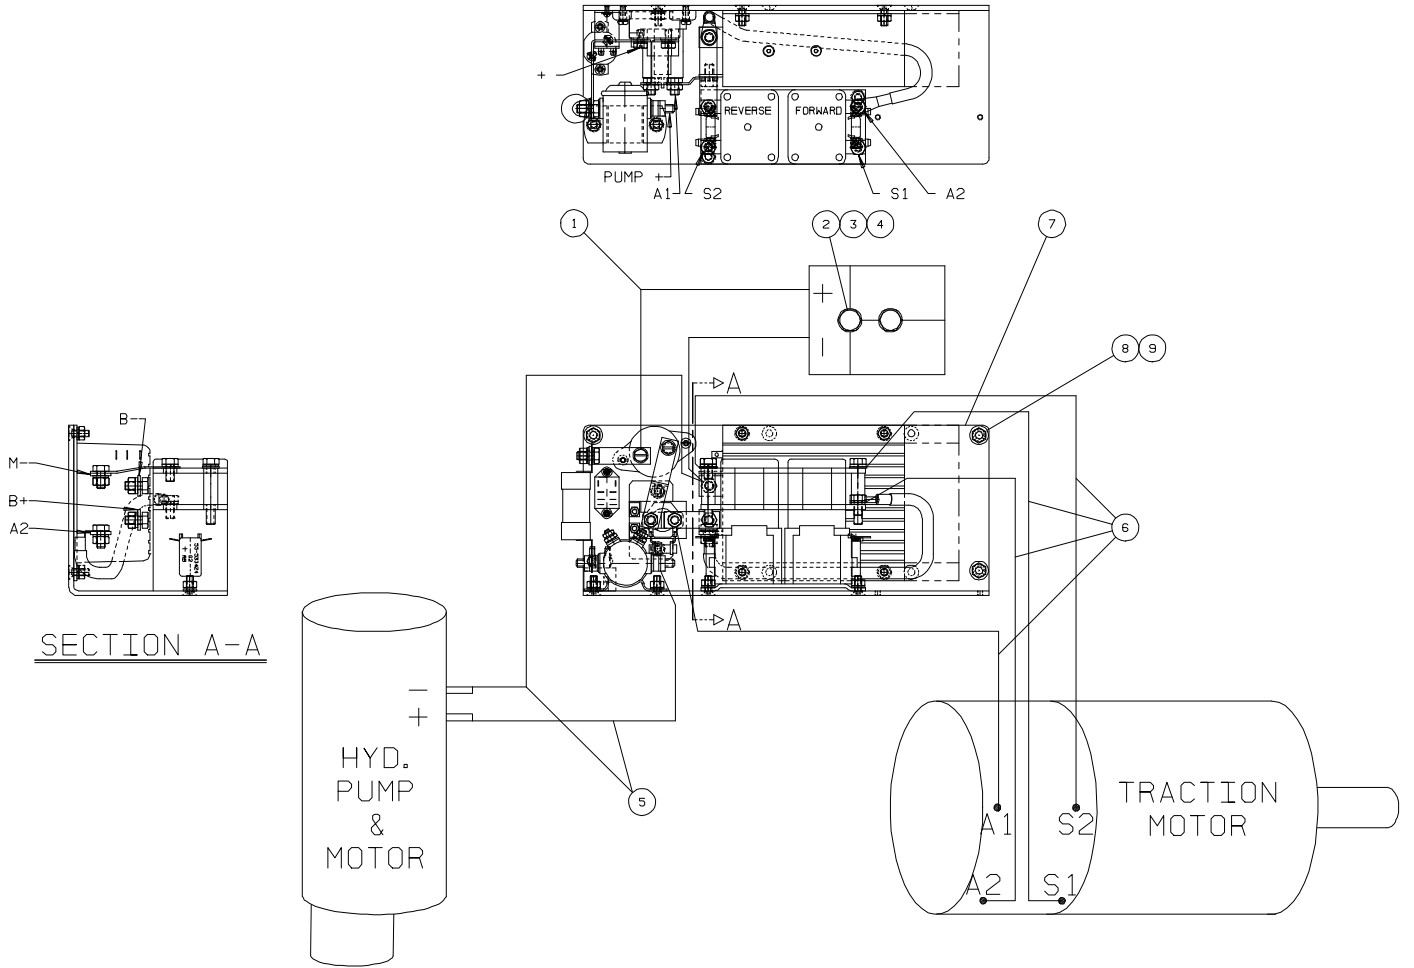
PUMP MOTOR ASSEMBLY
